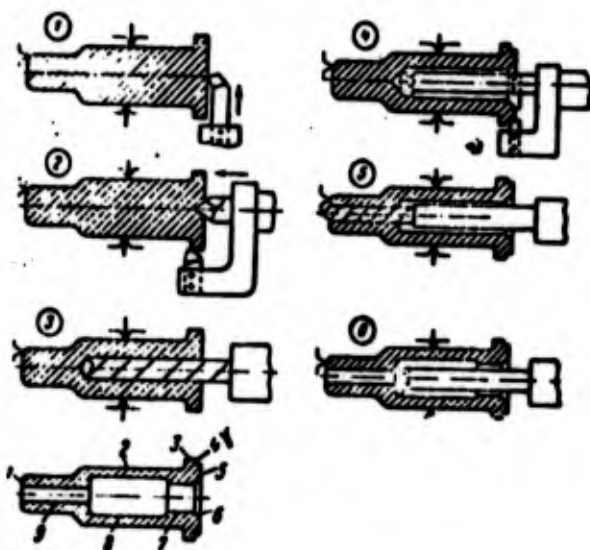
Adjustment of turret lathe for the treatment of a shaft: 1-9 - to be treated surfaces.
